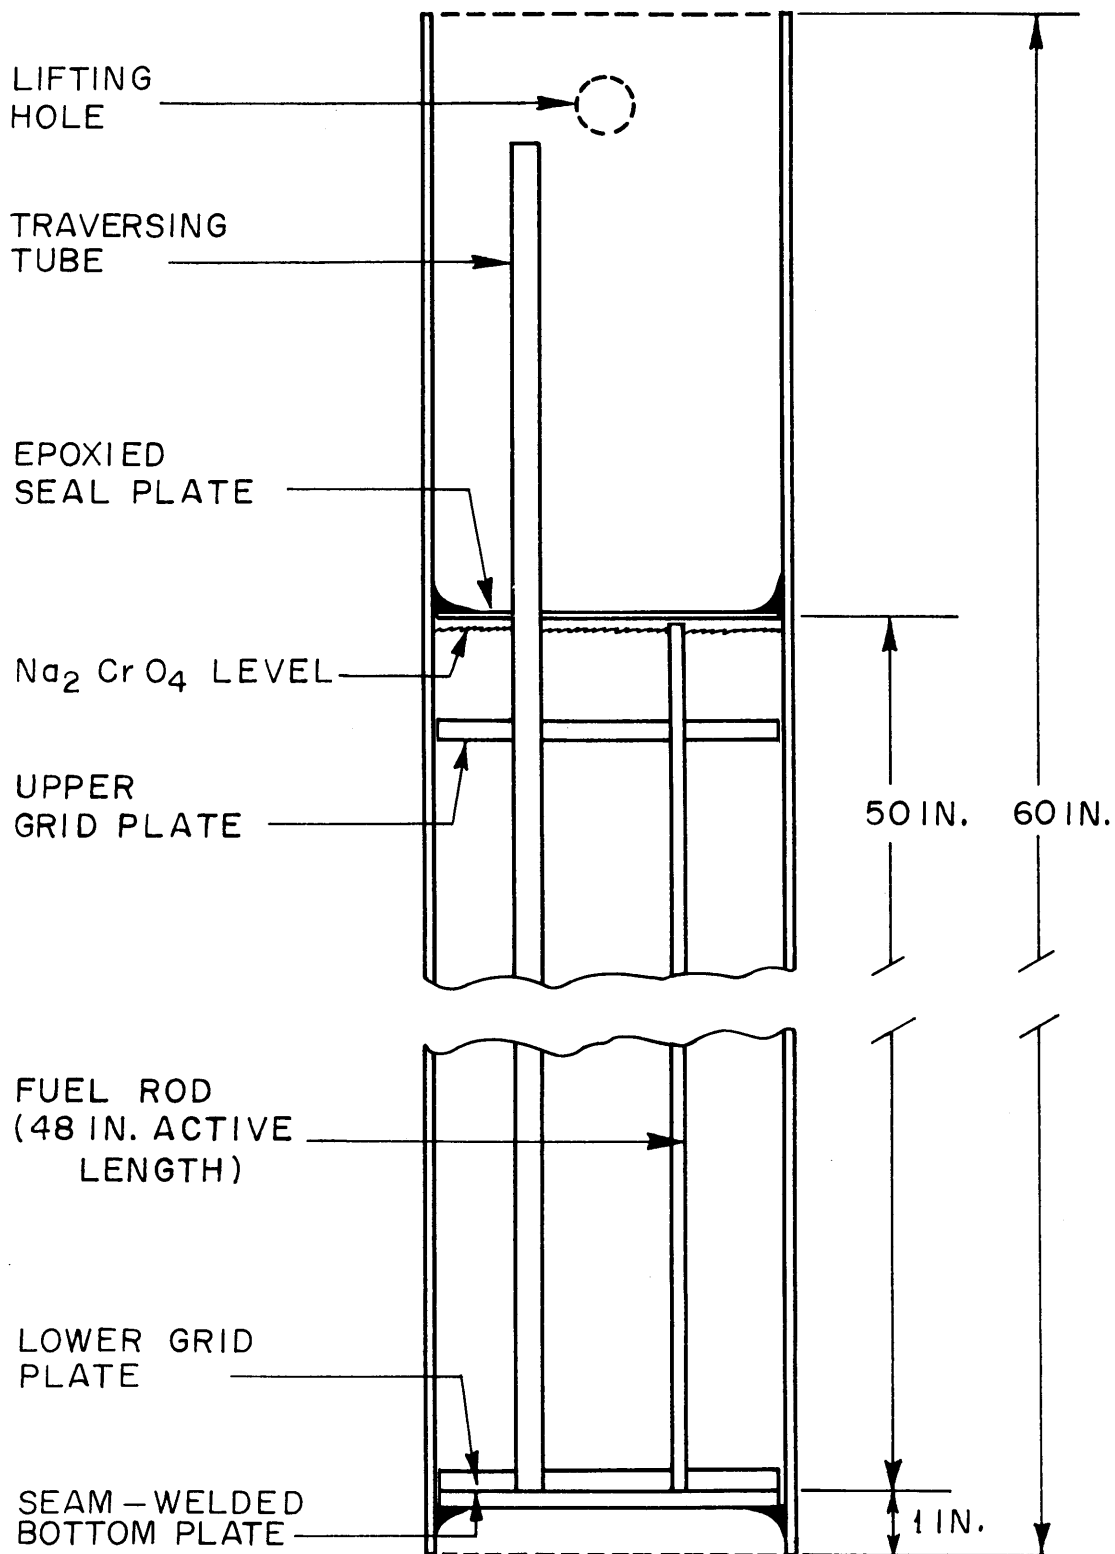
SCHEMATIC CROSS SECTION VIEW OF BLANKET NO. 2 SUBASSEMBLY
